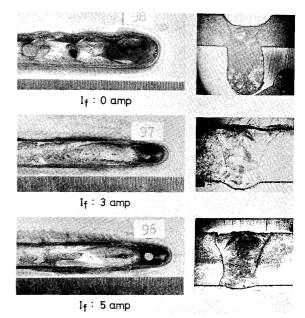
Change in bead appearance and cross section of welds with applied magnetic field. 160 A, 46 V, 8 l/min and 26 cm/min.
